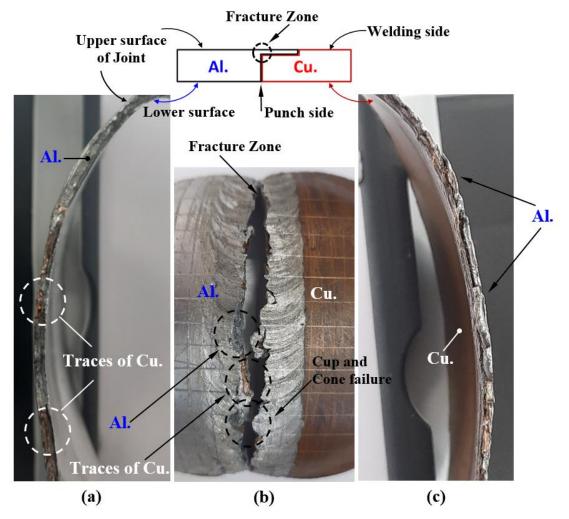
Image of the fractured Al-Cu joint after the cup test, where (a) is a cross section of the fracture zone at the Aluminum side, (b) is Al-Cu joint after fracture and (c) is a cross section of the fracture zone at the copper side. The Al-Cu joint is welded at a rotational speed of 910 rpm and traverse speed of 16 mm/min. The copper has been annealed.
